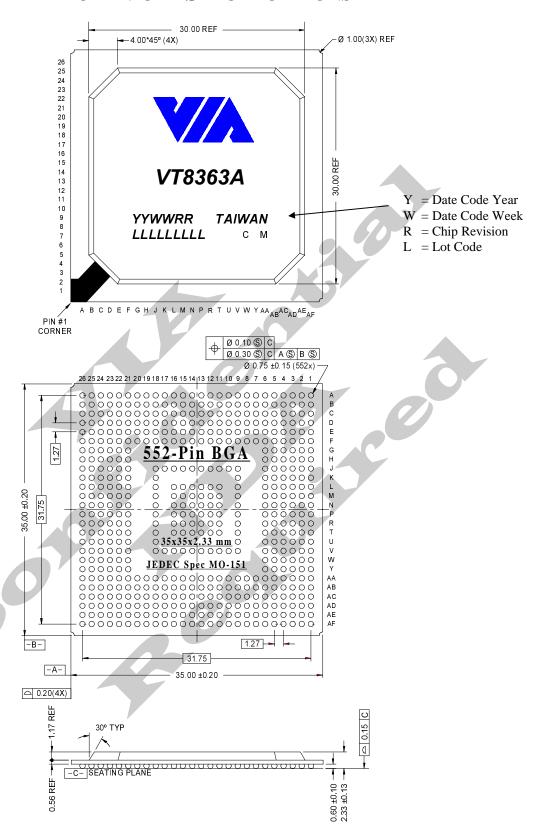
Mechanical Specifications - 552-Pin Ball Grid Array Package
